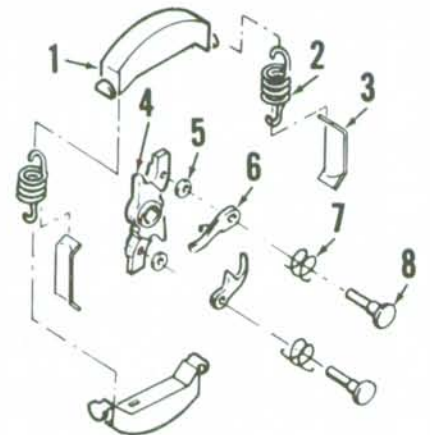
Exploded view of clutch used on all models except SP80.
